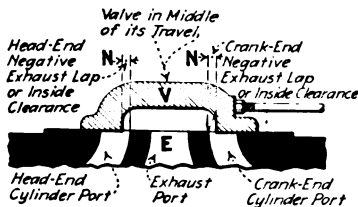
A slide valve with negative exhaust lap or "inside clearance."
